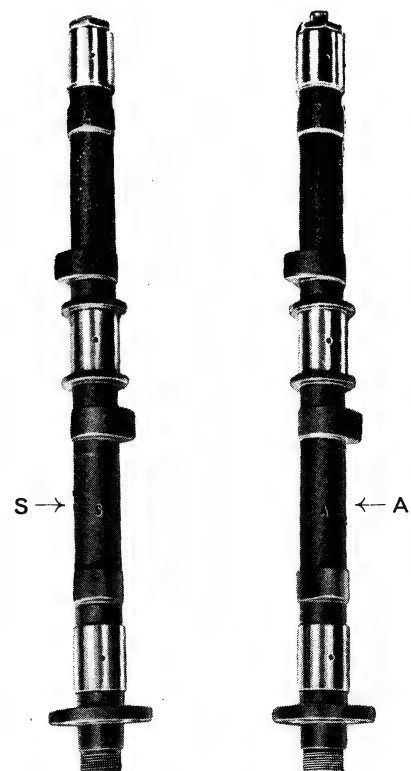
Camshafts: exhaust valve camshaft is marked S (left) and intake valve camshaft is marked A (right).
